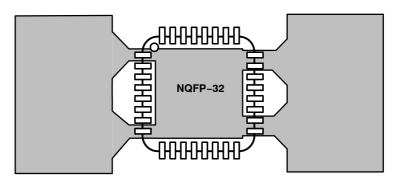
Example of NQFP-32 PCB Ground Plane Layout in Top View (Preferred Layout at Top and Bottom)
